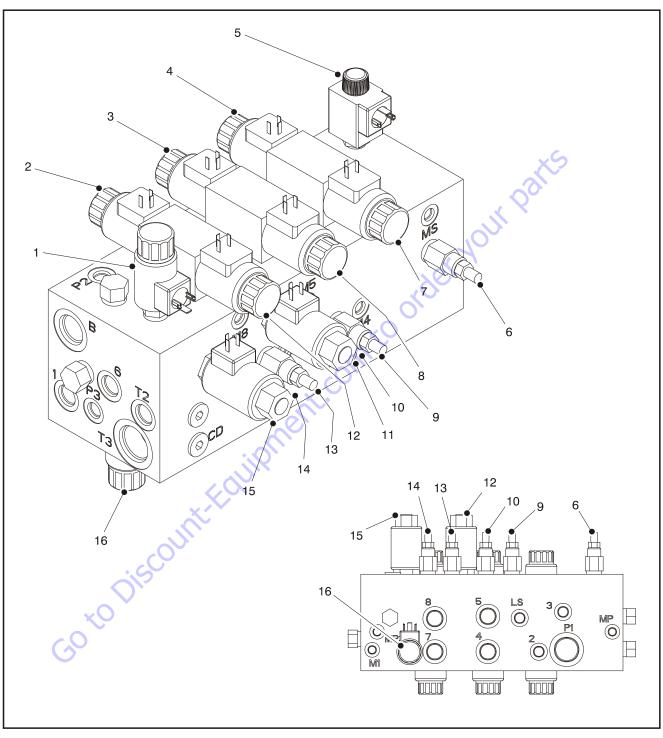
Jib Control Valve Fitting Torque Specifications
